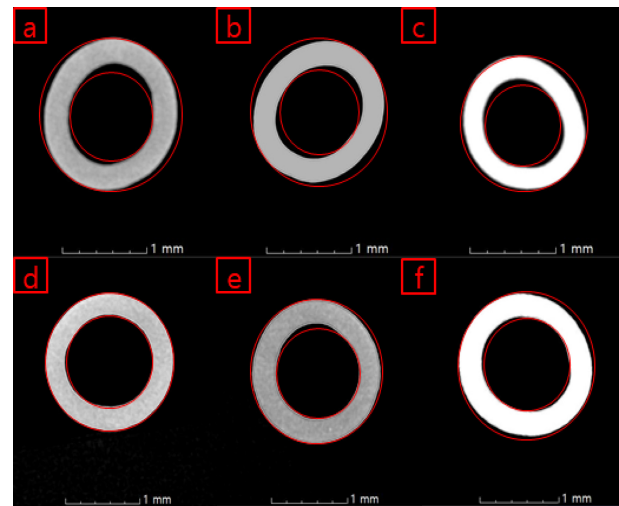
Tube cross section of the extrusion w/o & with calibrator w/o cal. a) 20°C, b) 40°C, c) 60°C w/ cal. d) 20°C, e) 40°C, f) 60°C
